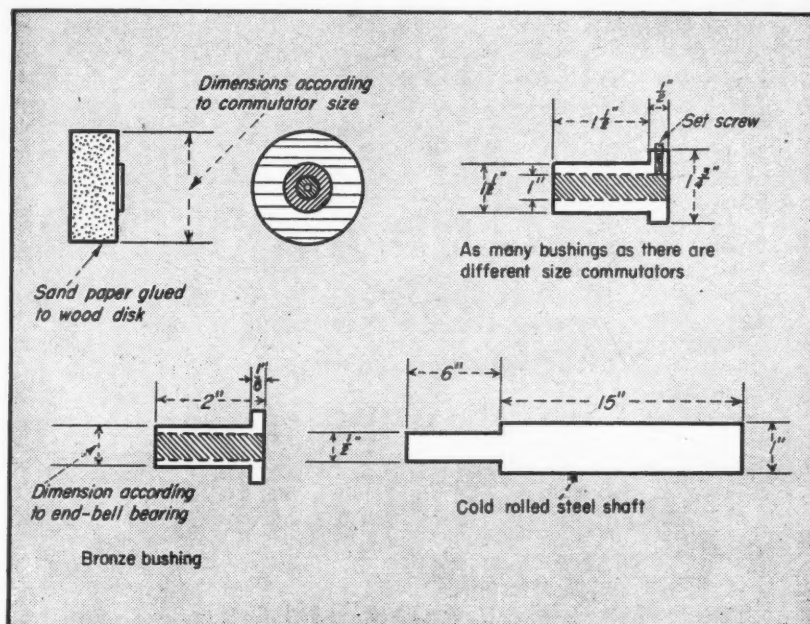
Details of sanding disc, shaft and brushing construction.
